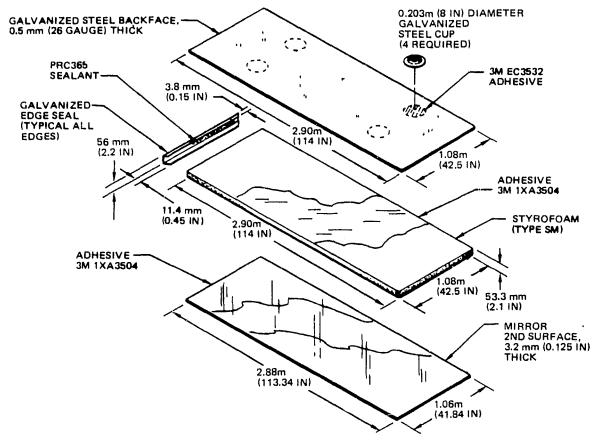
Mirror Module Components—Exploded View Showing Steel, Foam Glass Edge Seal, and Adhesives
